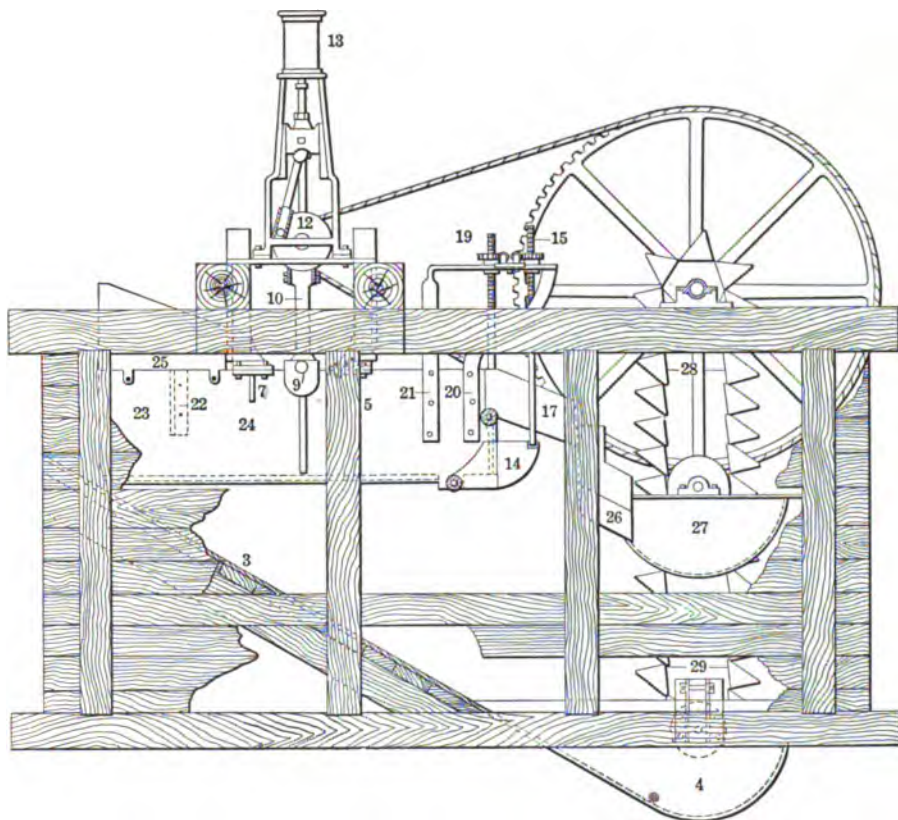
SECTIONAL SIDE ELEVATION OF CHRIST JIG.
